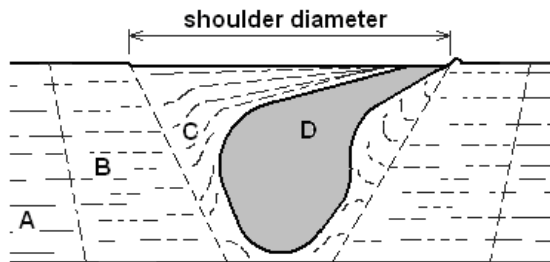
Schematic of the transversal section of a FSW joint. A – base metal, B – heat affected zone, C – thermo-mechanically affected zone, D – stirred zone (nugget).
